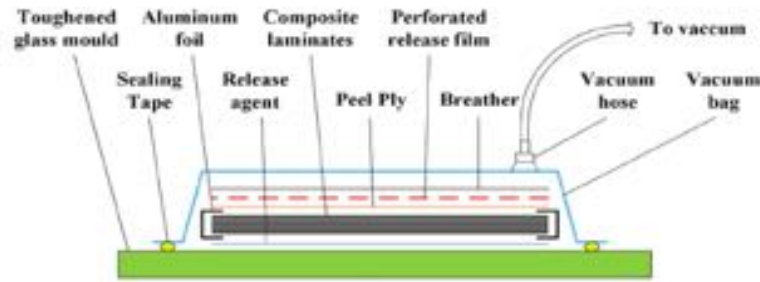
Vacuum Bagging Technique Process (M. S. Ismail, 2019)
